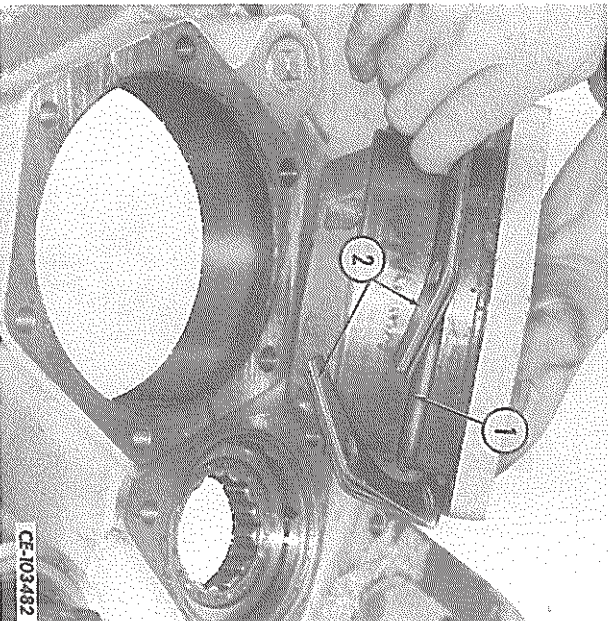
Removing the Pinion Shaft Front Bearing Cage
